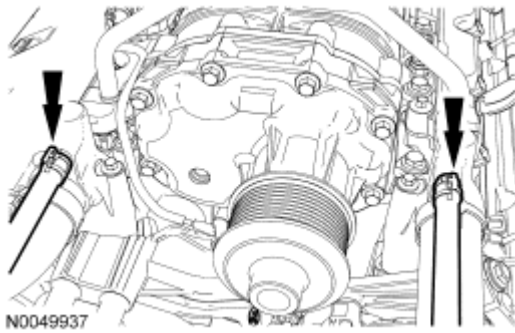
Locating Coolant Vent Hoses From Intake Manifold
